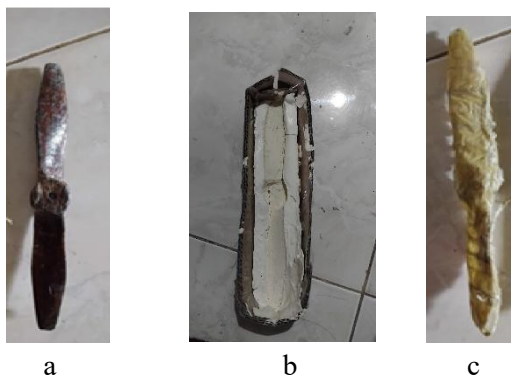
(a) Wooden propeller to be modeled; (b) talcum propeller mold; (c) Molded propeller
